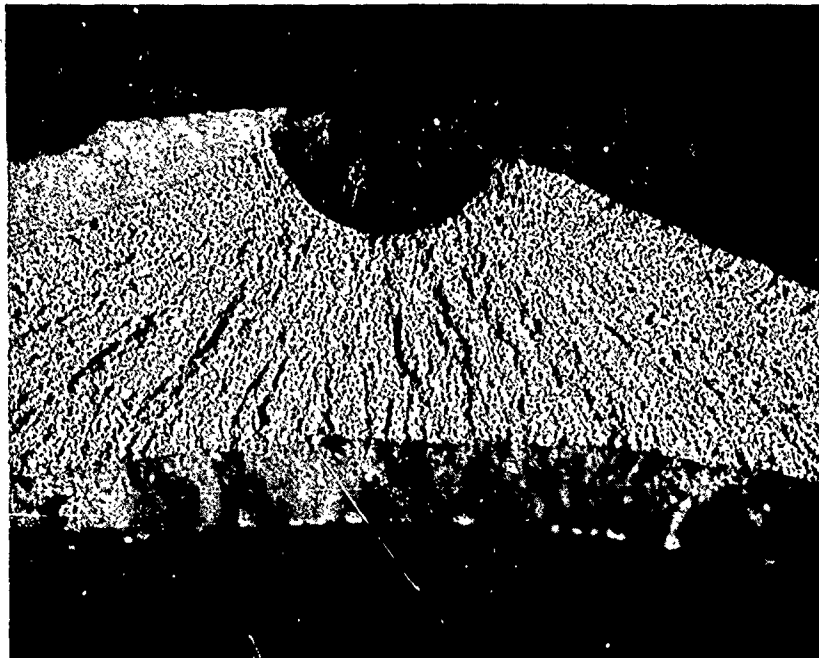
FRACTURE SURFACE OF FAILED 4330V MODIFIED STEEL CYLINDER
